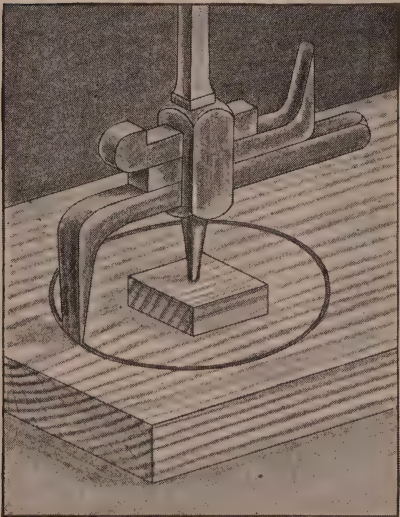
Method to Avoid Making Hole in Centre of Recess
